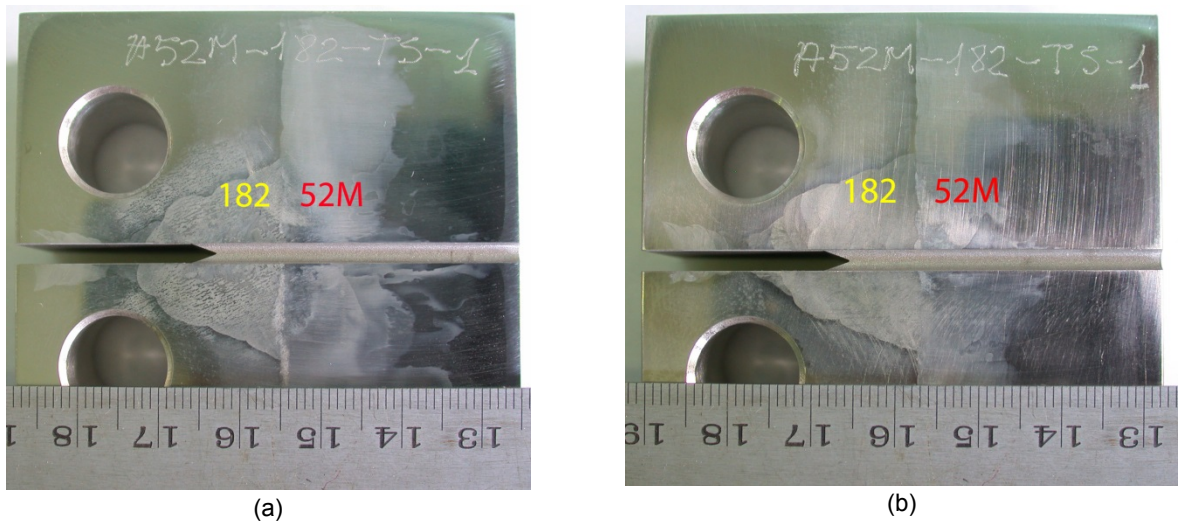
Photographs of the two sides of the 52M/182 weld overlay specimen A52M-182-TS-1.
